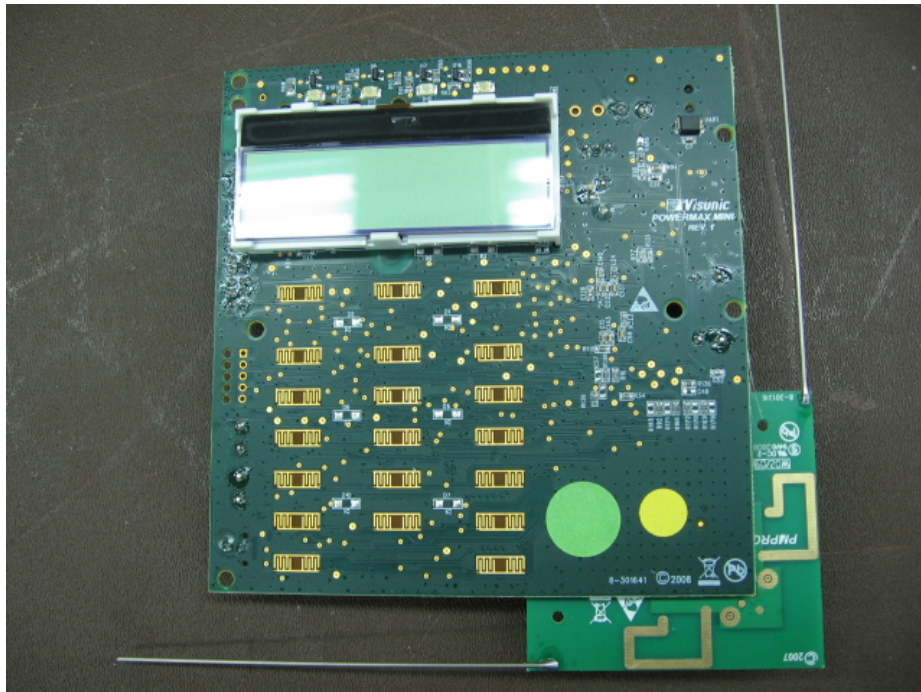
PowerMax Mini PCB and PMPRO Transceiver PCB (Bottom)
